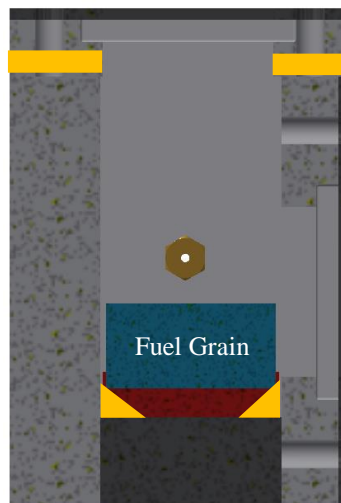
Welding joints for inner panels of combustion chamber
